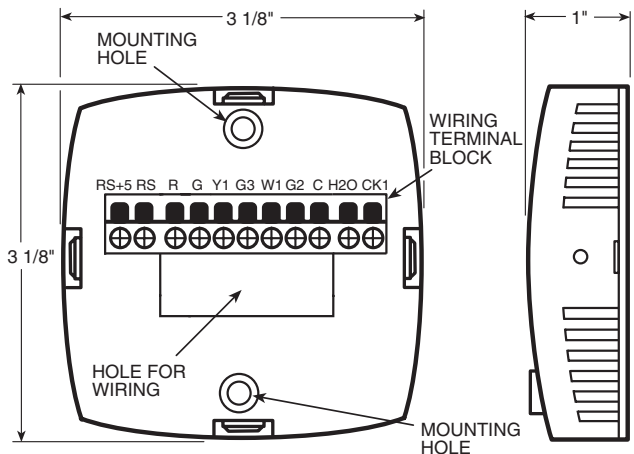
Thermostat Back Plate Mounting and Wiring
